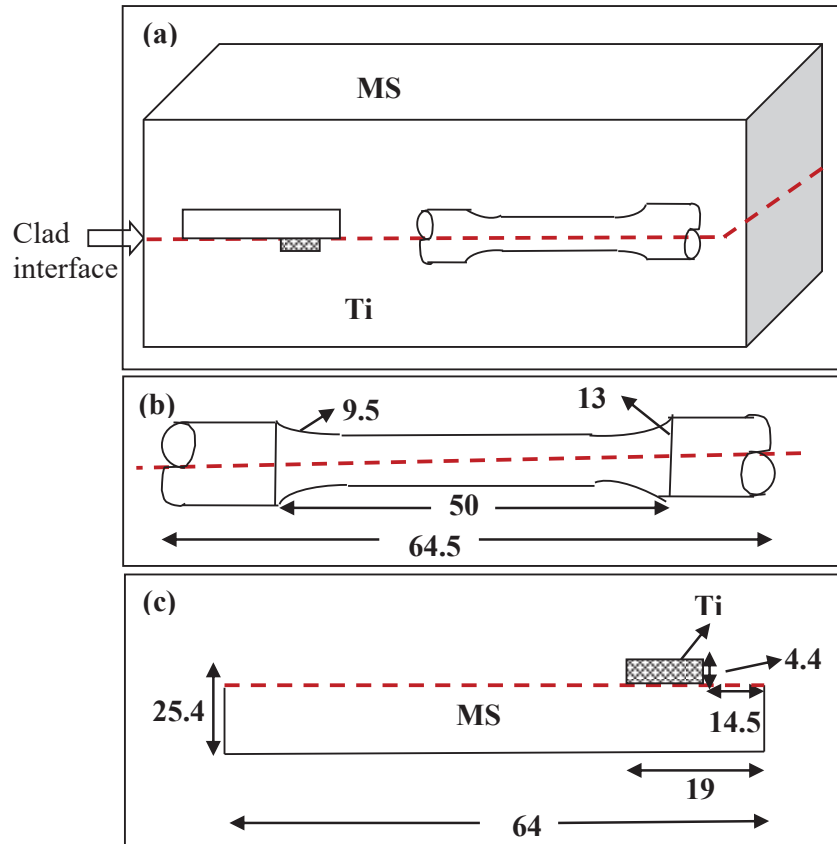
Schematic of (a) MS/Ti ‘as clad’s showing orientation of the specimens fabricated for tensile and shear tests, dimensions of (b) tensile and (c) shear test specimens (all dimensions are in mm)
